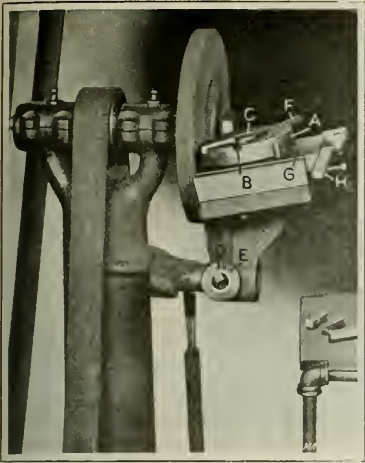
Disk Grinder with Swiveling Attachment for grinding End of Chasers
